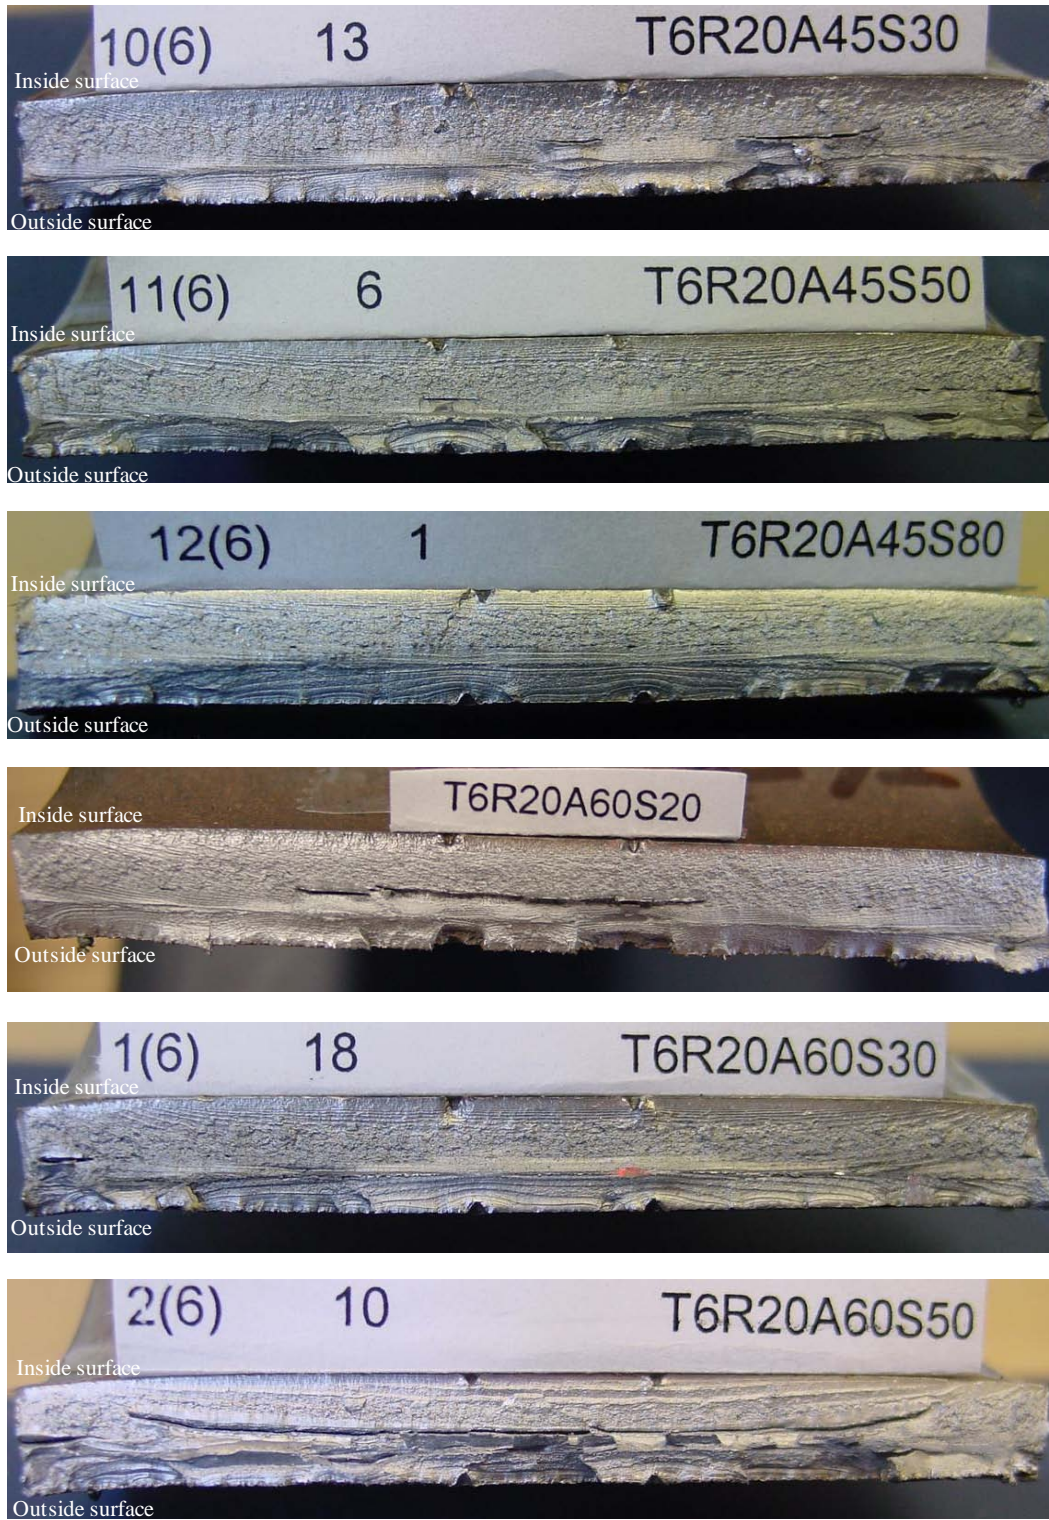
Pictures of fracture surface: strip specimen series of T6R20
